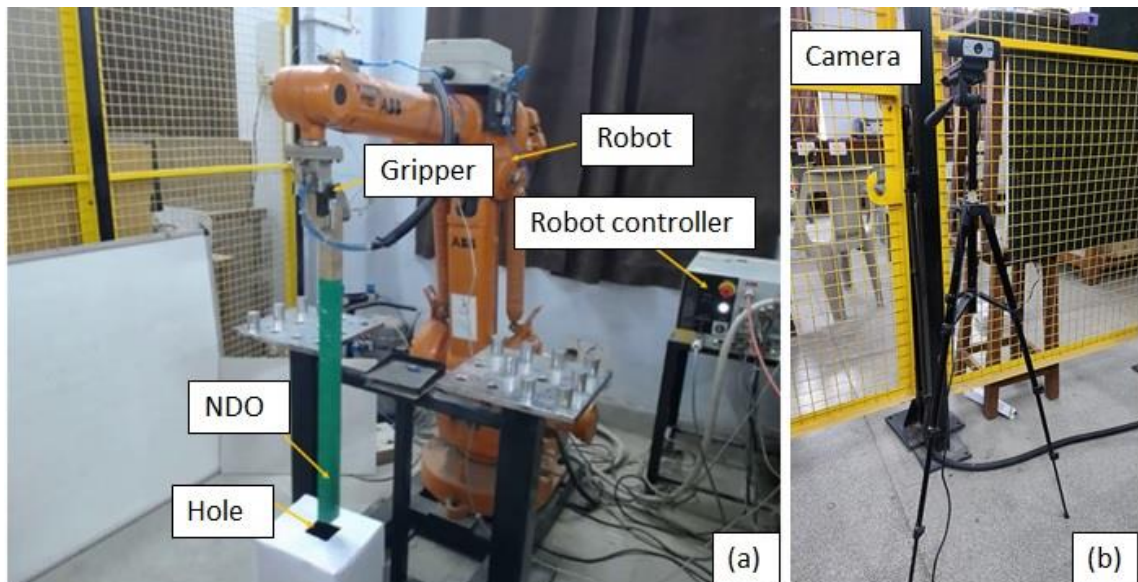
(a) Robotic peg in hole assembly environment and (b) Camera used in assembly operation.
